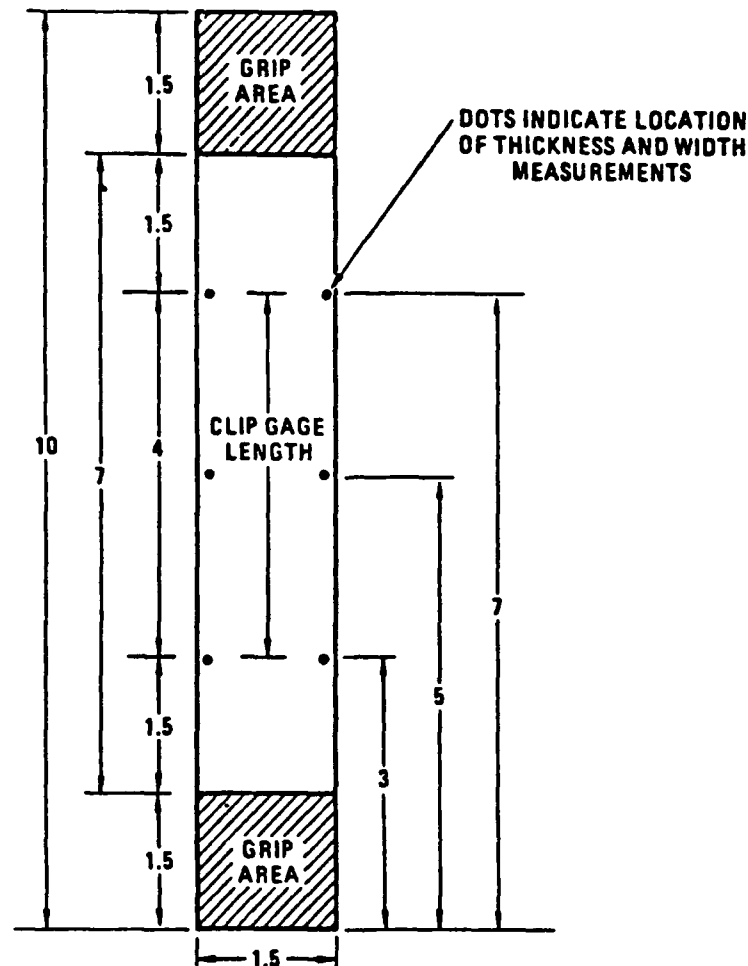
Crack-Lap Shear Specimen (All Dimensions in Inches)
